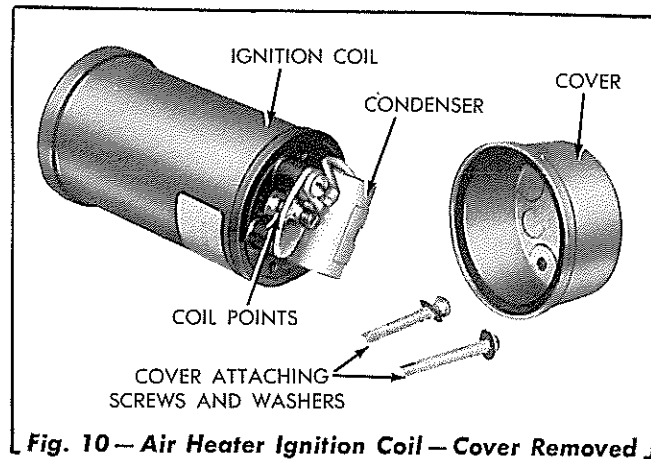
Air Heater Ignition Coil — Cover Removed
